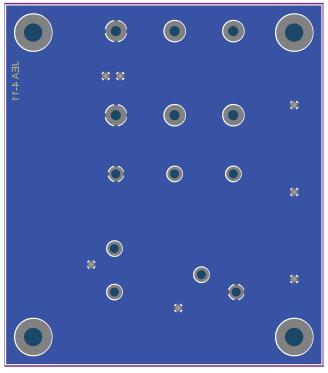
MAX34564/MAX34565 EV Kit PCB Bottom
